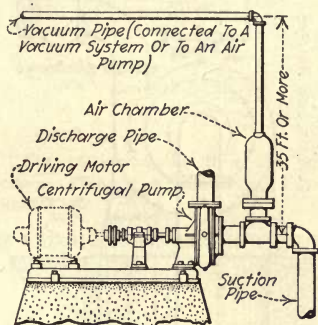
Centrifugal-Pump Suction Line Equipped With Air-Chamber.
